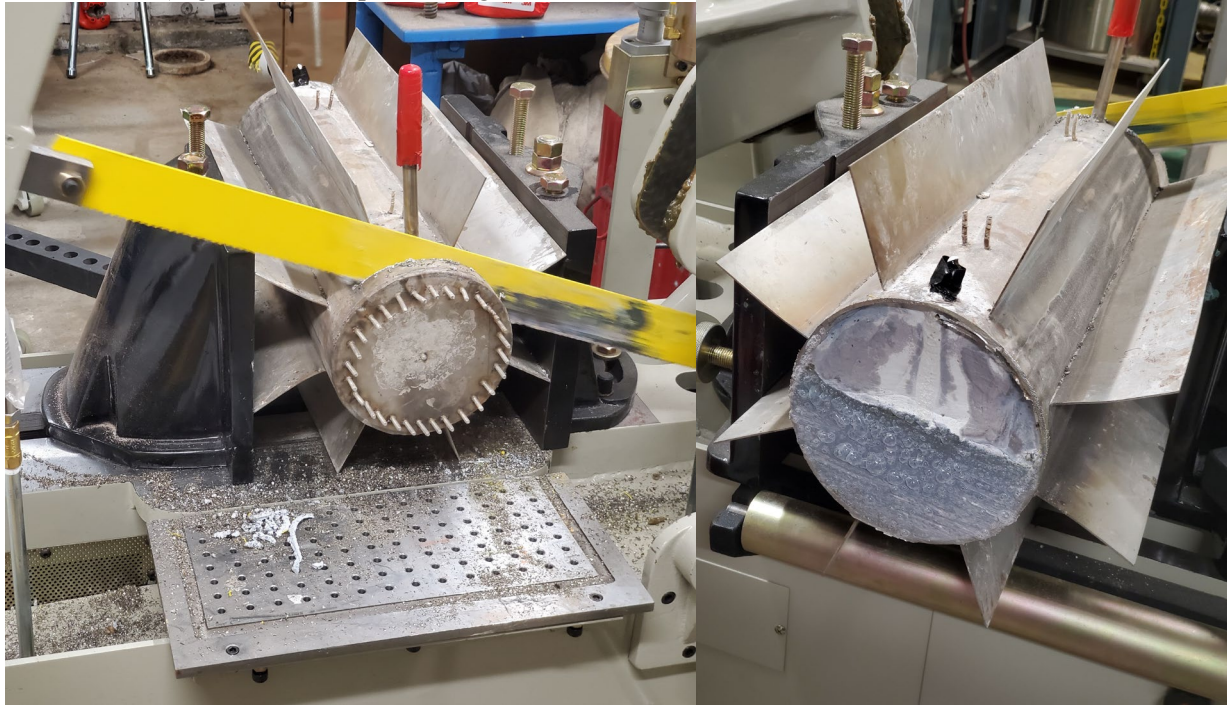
Hacksaw Cutting End Off of Legacy Cold Trap (left) and Exposed Sodium (right).
